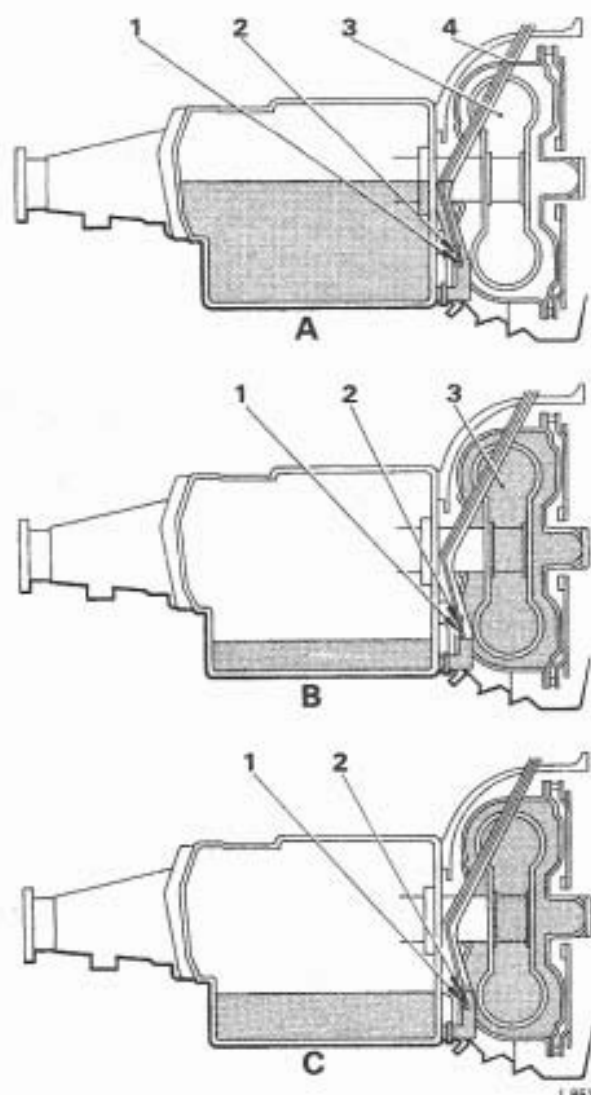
FILLING AND TOPPING-UP THE GEARBOX
